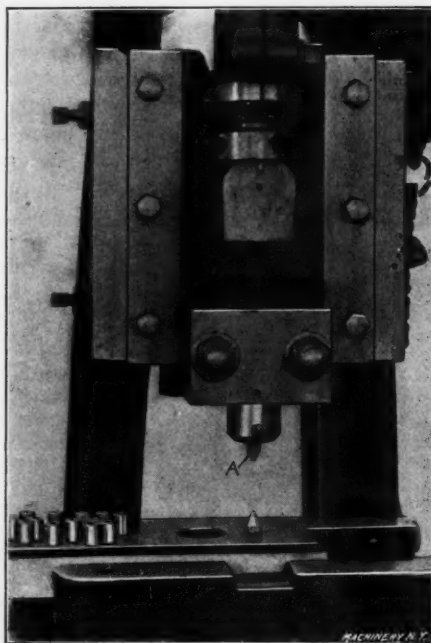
Making a Three-cornered Center used for Driving, in the Grinding Operations
